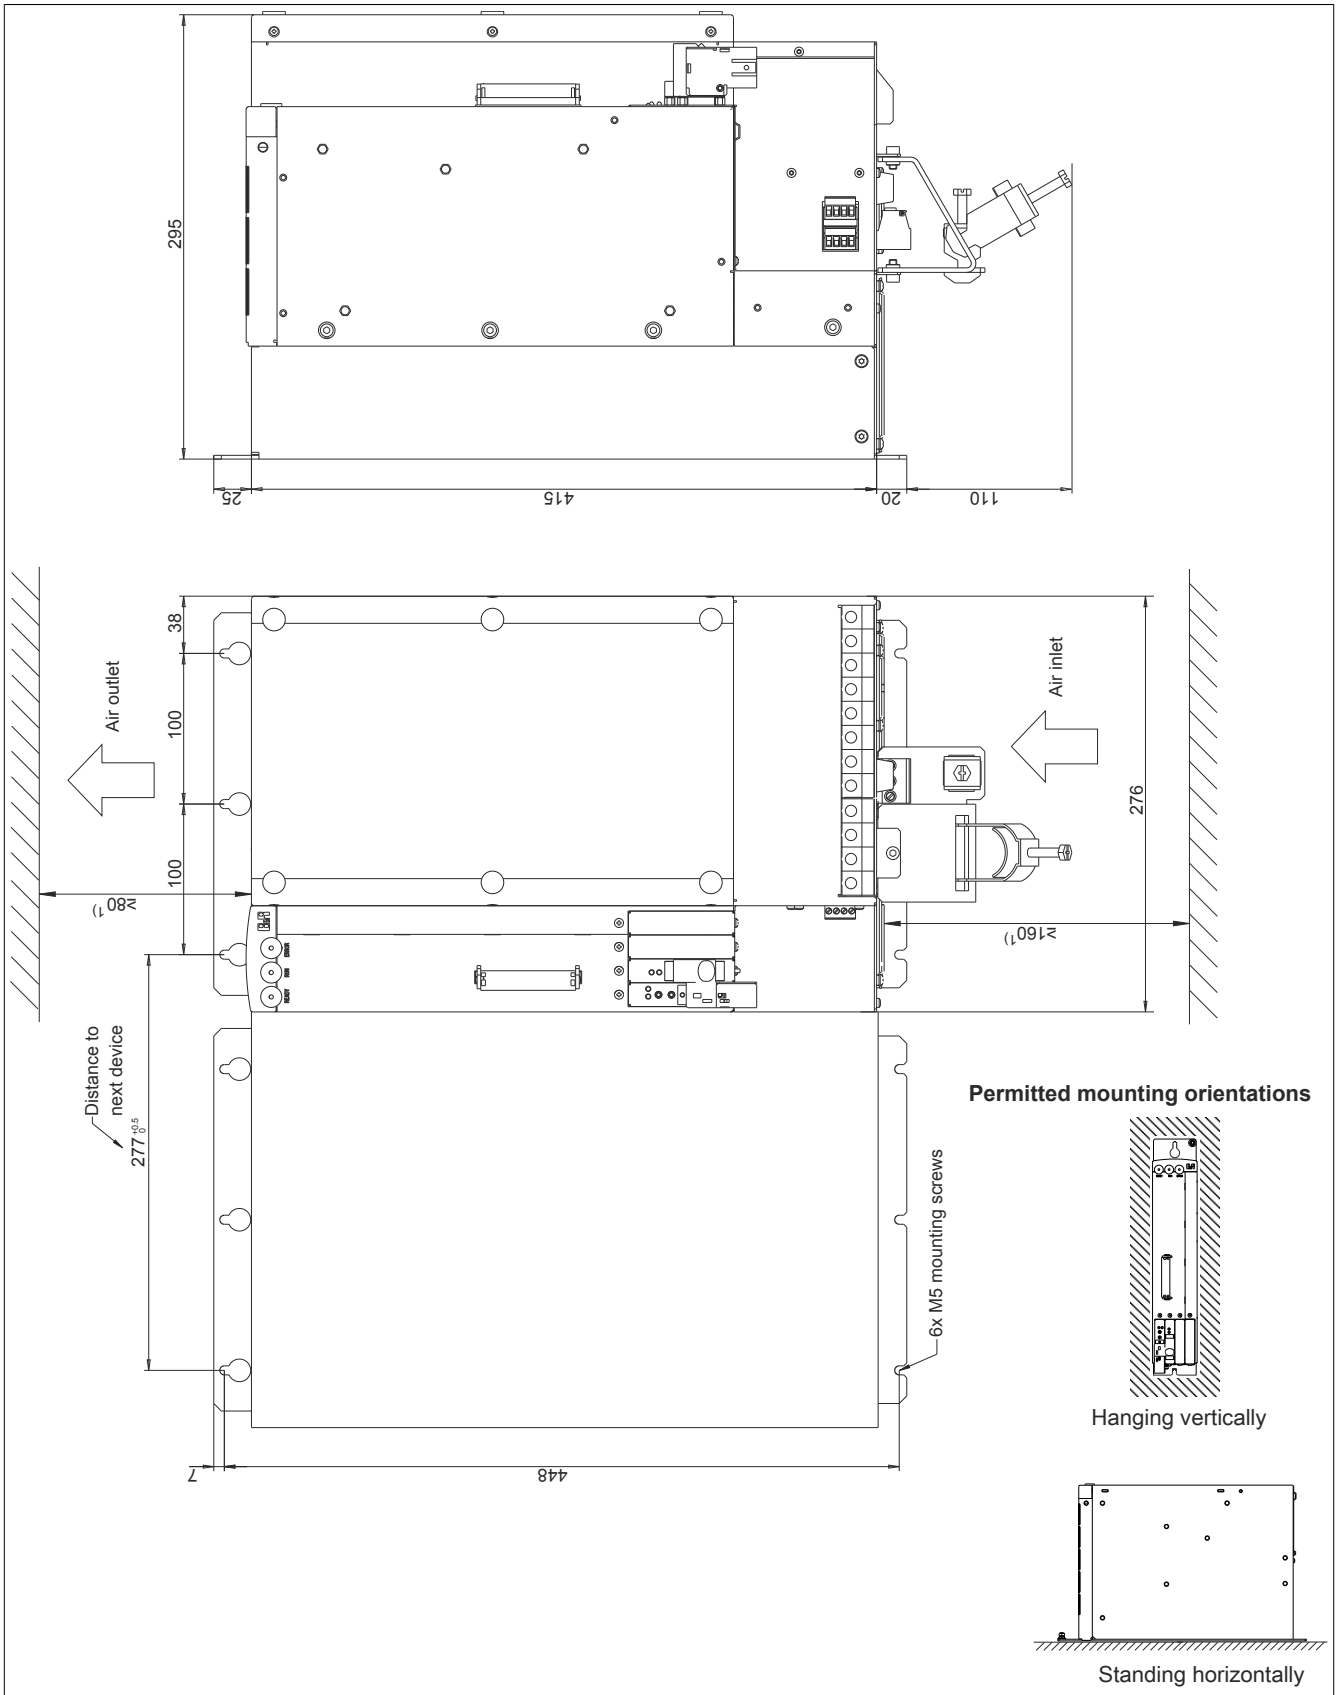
ACOPOS 1640 - Dimension diagram and installation dimensions
